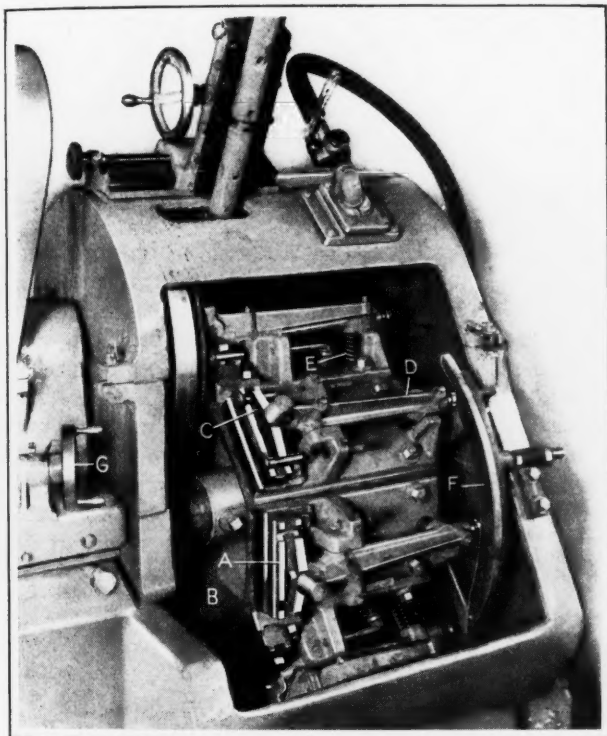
Close-up View of the Carrier on the Machine Shown in Fig. 8, with its Valve Tappet Clamping Mechanisms
